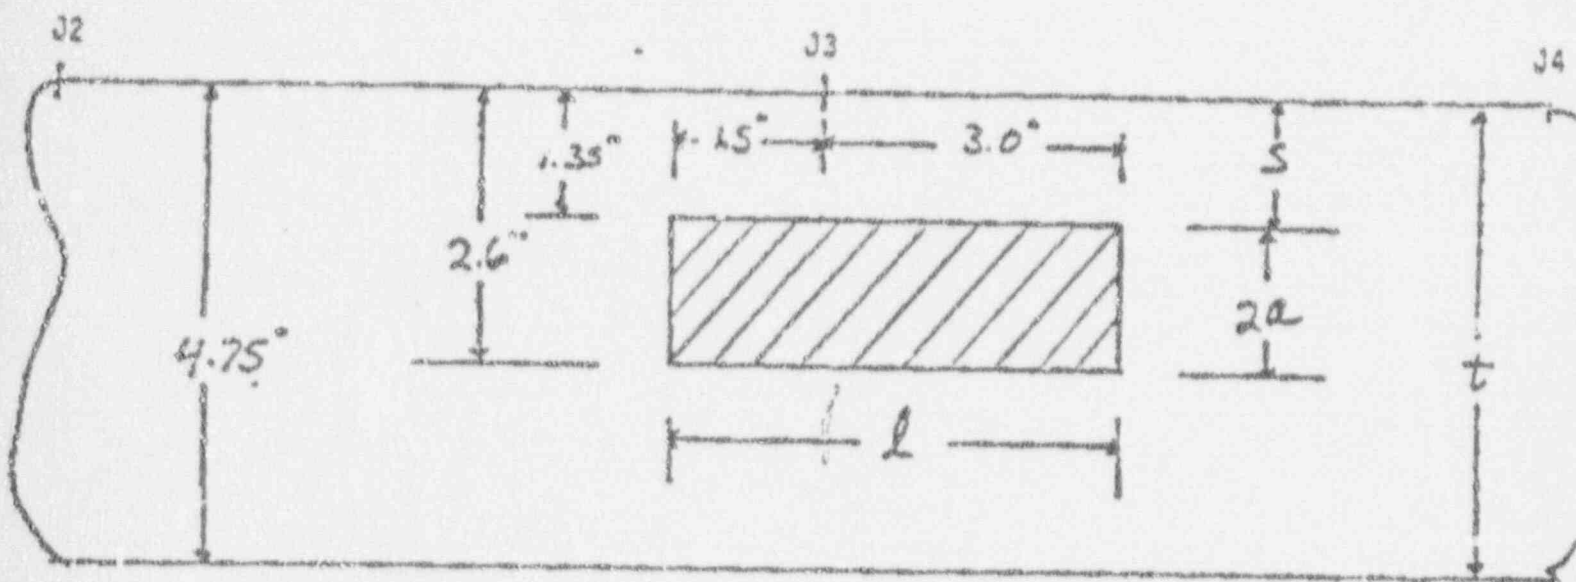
Byron-Jackson Reactor Coolant Pump Weld and Base Material Thickness Upper Scroll Weld Flaw Indication ANO-1 "B" RCP 1988 UT Exam
